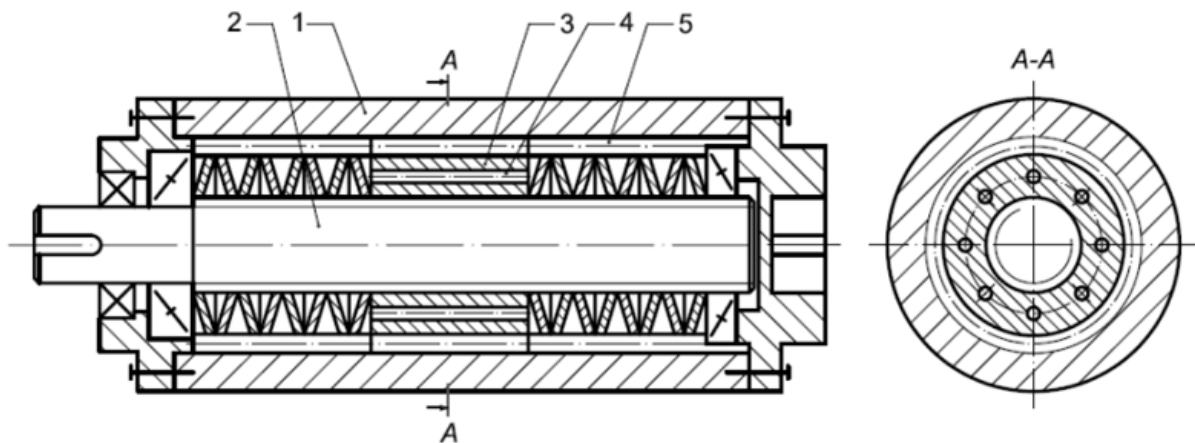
Construction of two-way torsionally flexible metal clutch with a hydraulic vibration damper, where: 1- housing, 2 - screw, 3 - movable element (nut), 4 - holes, 5 - sliding shape connection [7].
